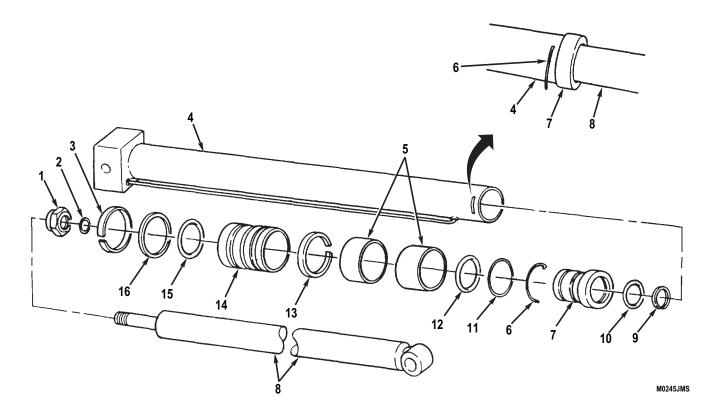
Hydraulic Positioning Cylinder (without Side Lift Kit) Disassembly.
